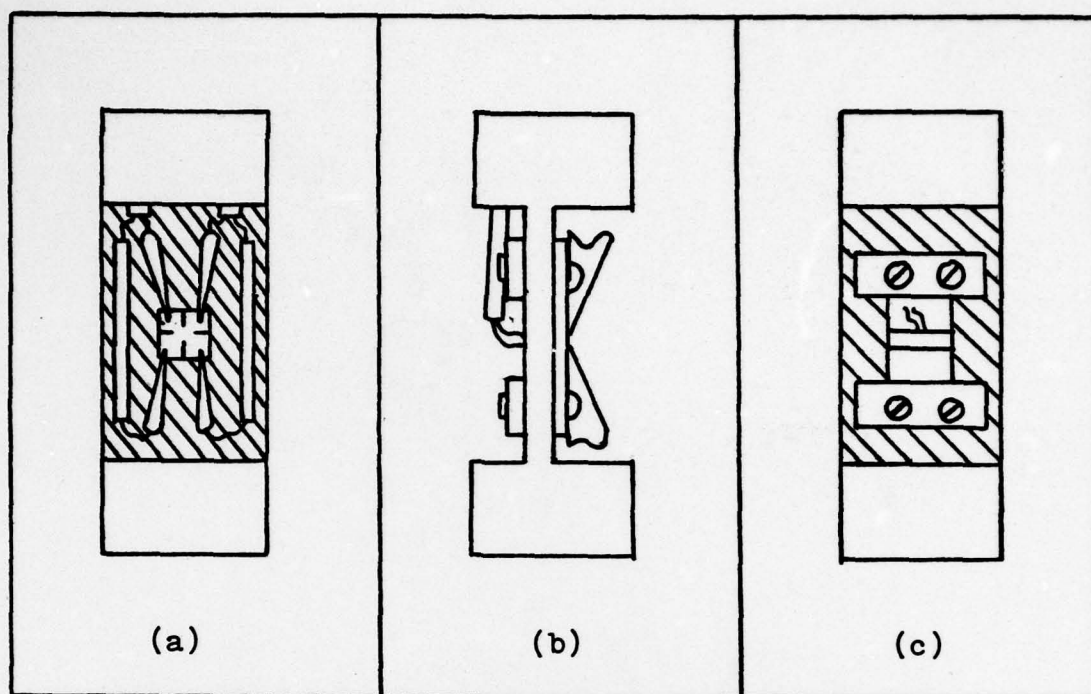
Three Views of Sample Holder; (a) Front, (b) Side, and (c) Rear
